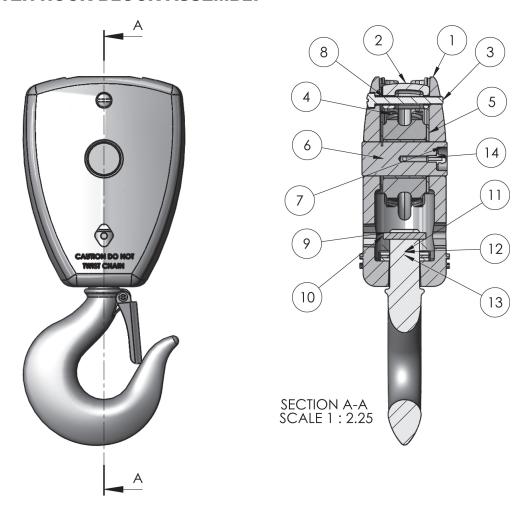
H. LOWER HOOK BLOCK ASSEMBLY 2 TON
